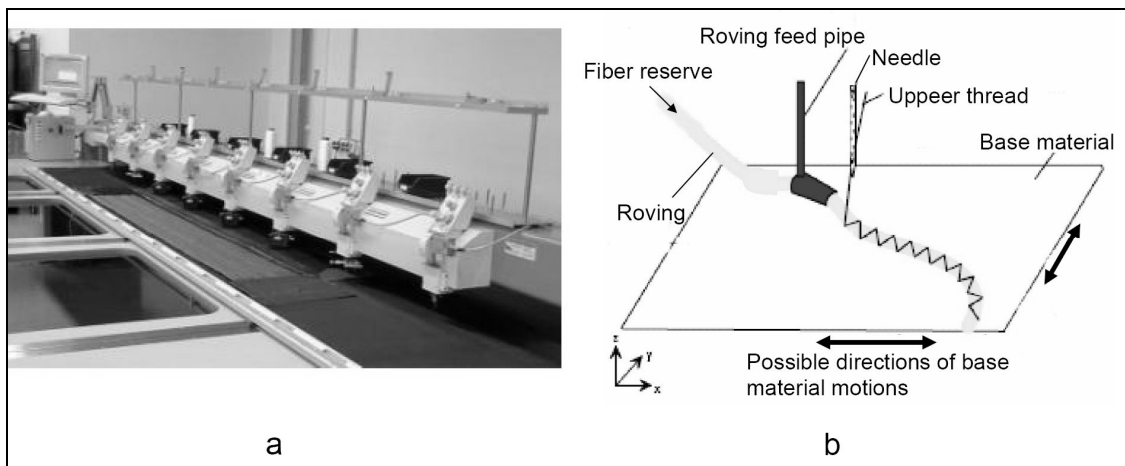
a) TFP machine and b) schematics of working principle [72]
